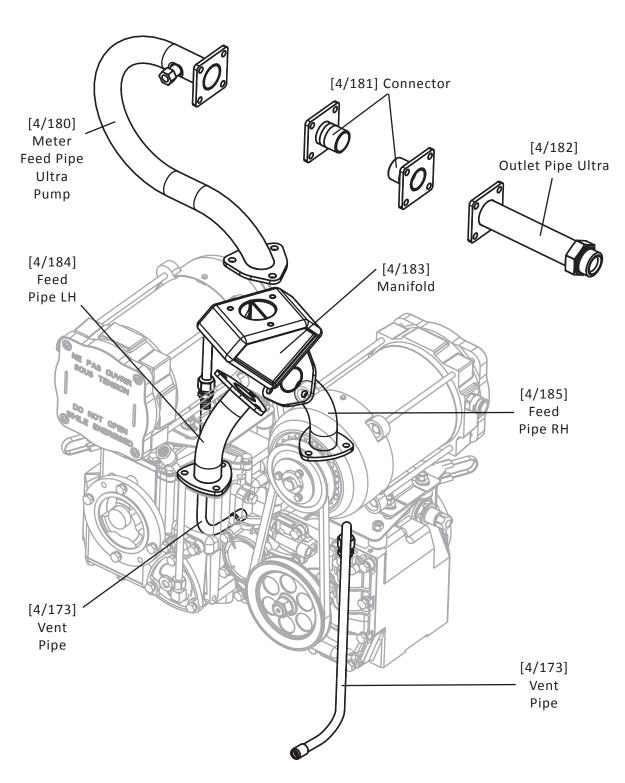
Hydraulic Pipework - UHF pump (suction) model - arrangement
